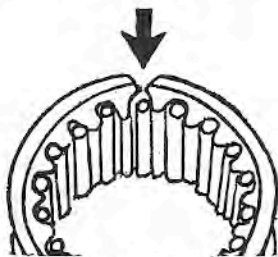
When installing needle bearing cages, make sure beveled ends are indexed as shown by arrow.
